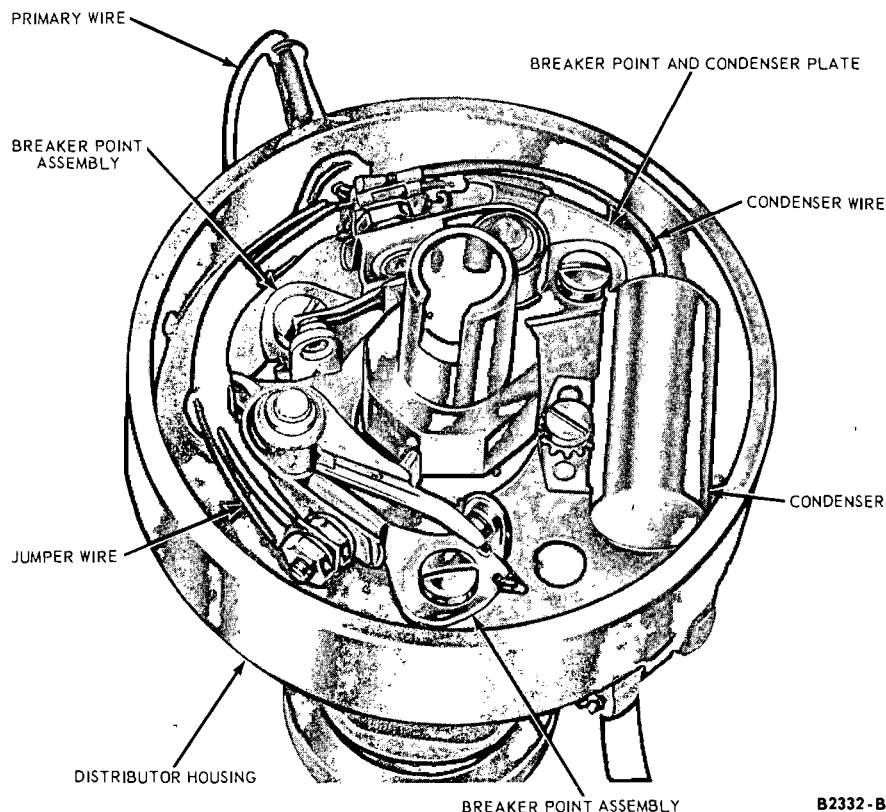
Breaker Plate Installed— Conventional Ignition System
